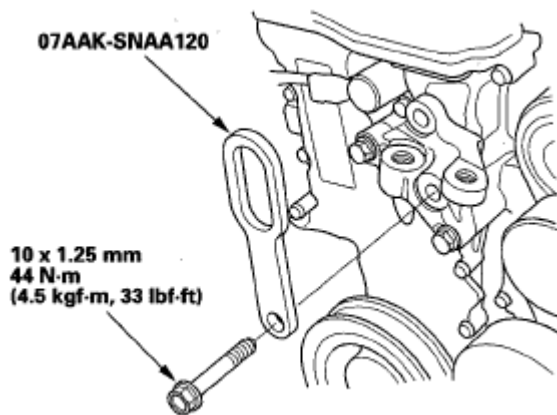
Identifying Side Engine Mount Bracket Bolts w/Torque Specification
